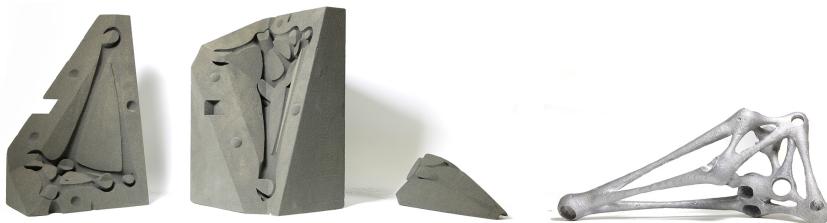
3D printed segments of a sand mold and a cast aluminium node. Photographer: Ma Xije.
